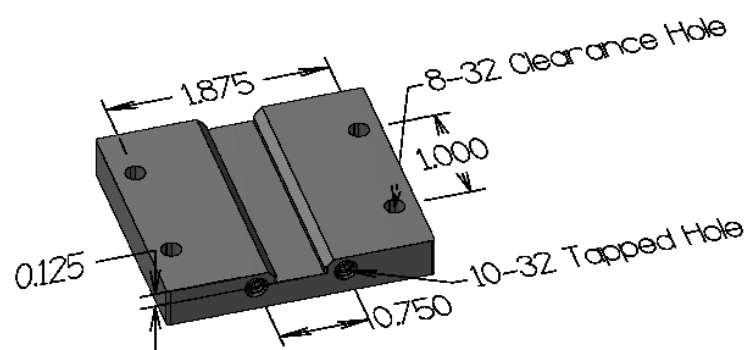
Drawing of the adjustable-valve holder for General Valve. The two holes on the front are tapped and secure the bottom of the General Valve faceplate. The groove down the center is cut out so that the body of the solenoid can rotate freely. This holder is attached to a metal block inside the chamber through four 8-32 screws.
